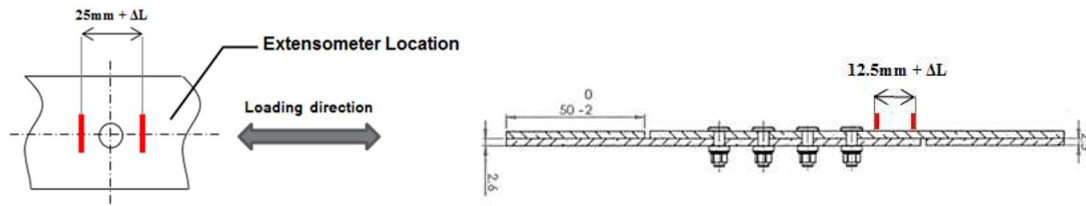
Location of extensometer for coupons of single and double lap shear specimens.
